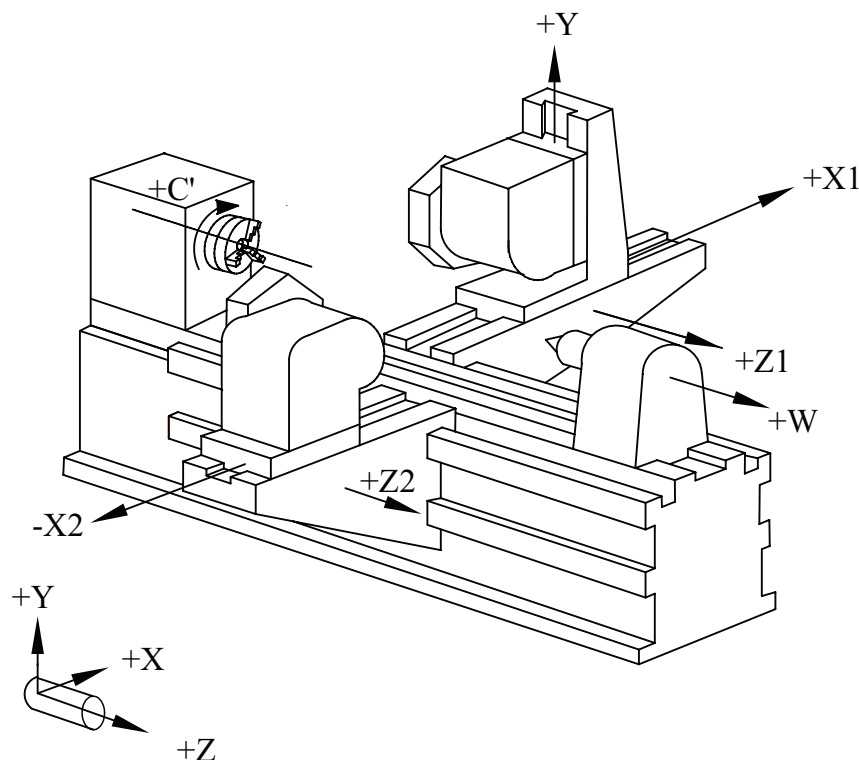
Typical example of a turning machine with a horizontal workholding spindle
